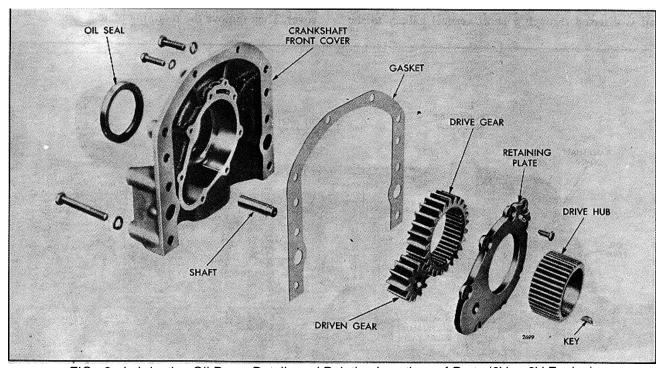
Lubricating Oil Pump Details and Relative Locations of Parts (6V or 8V Engine)
